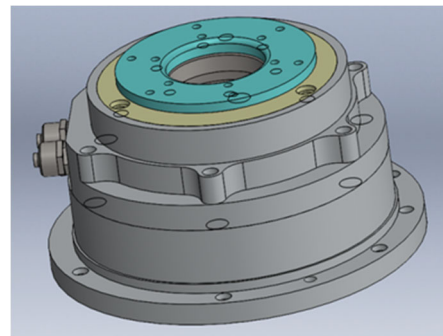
Schematic structure of diagram of the three-dimensional the hydraulic base
